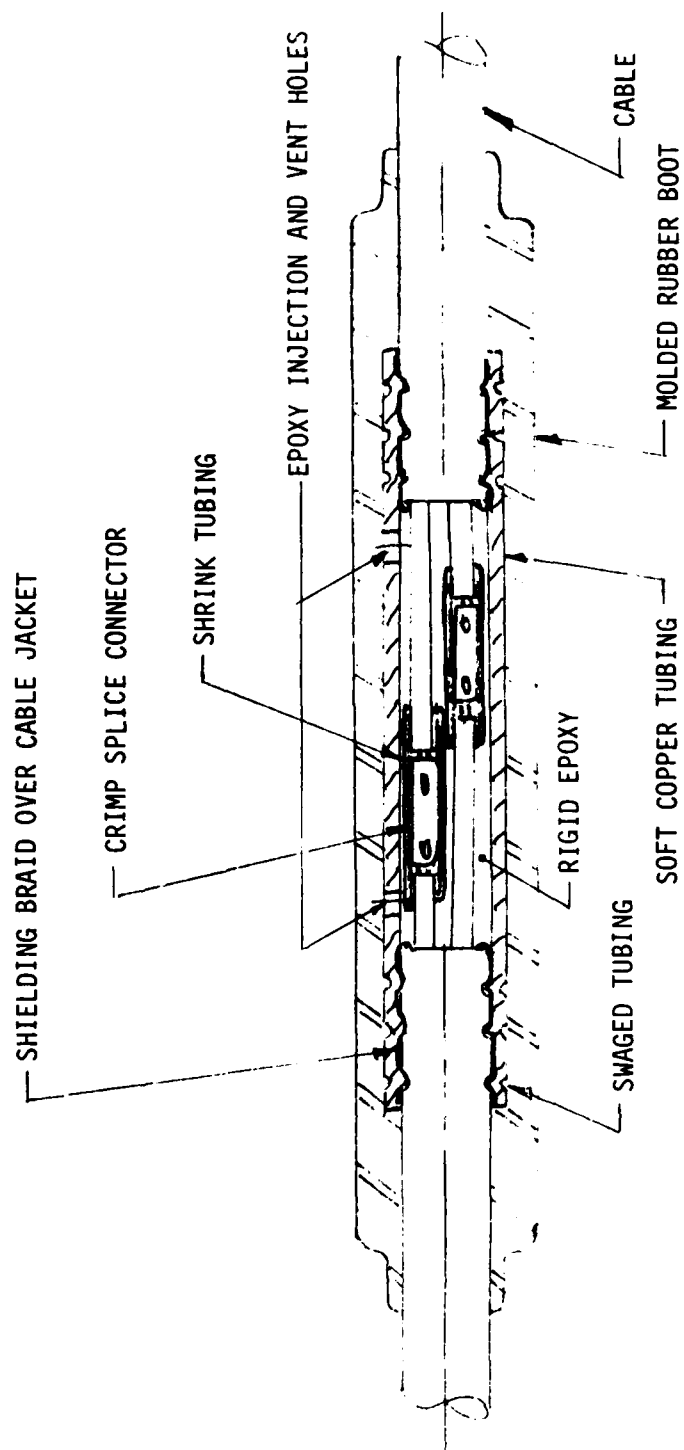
COPPER TUBING - MOLDED RUBBER SPLICE
